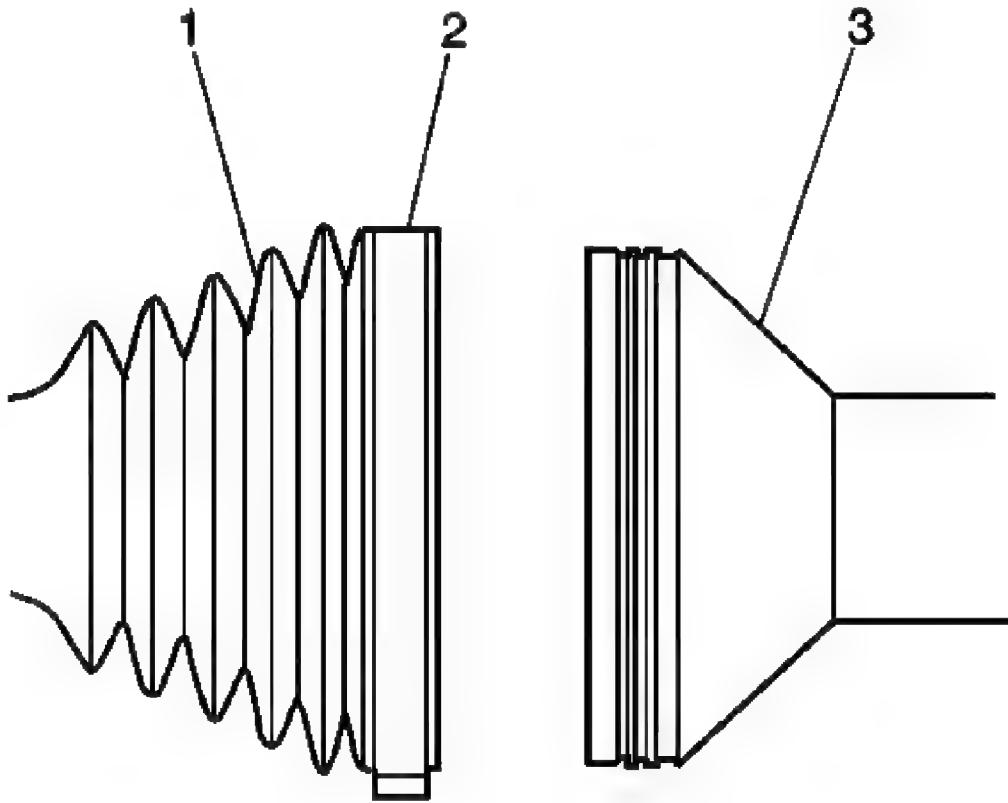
View Of Boot And Large Seal Retaining Clamp
